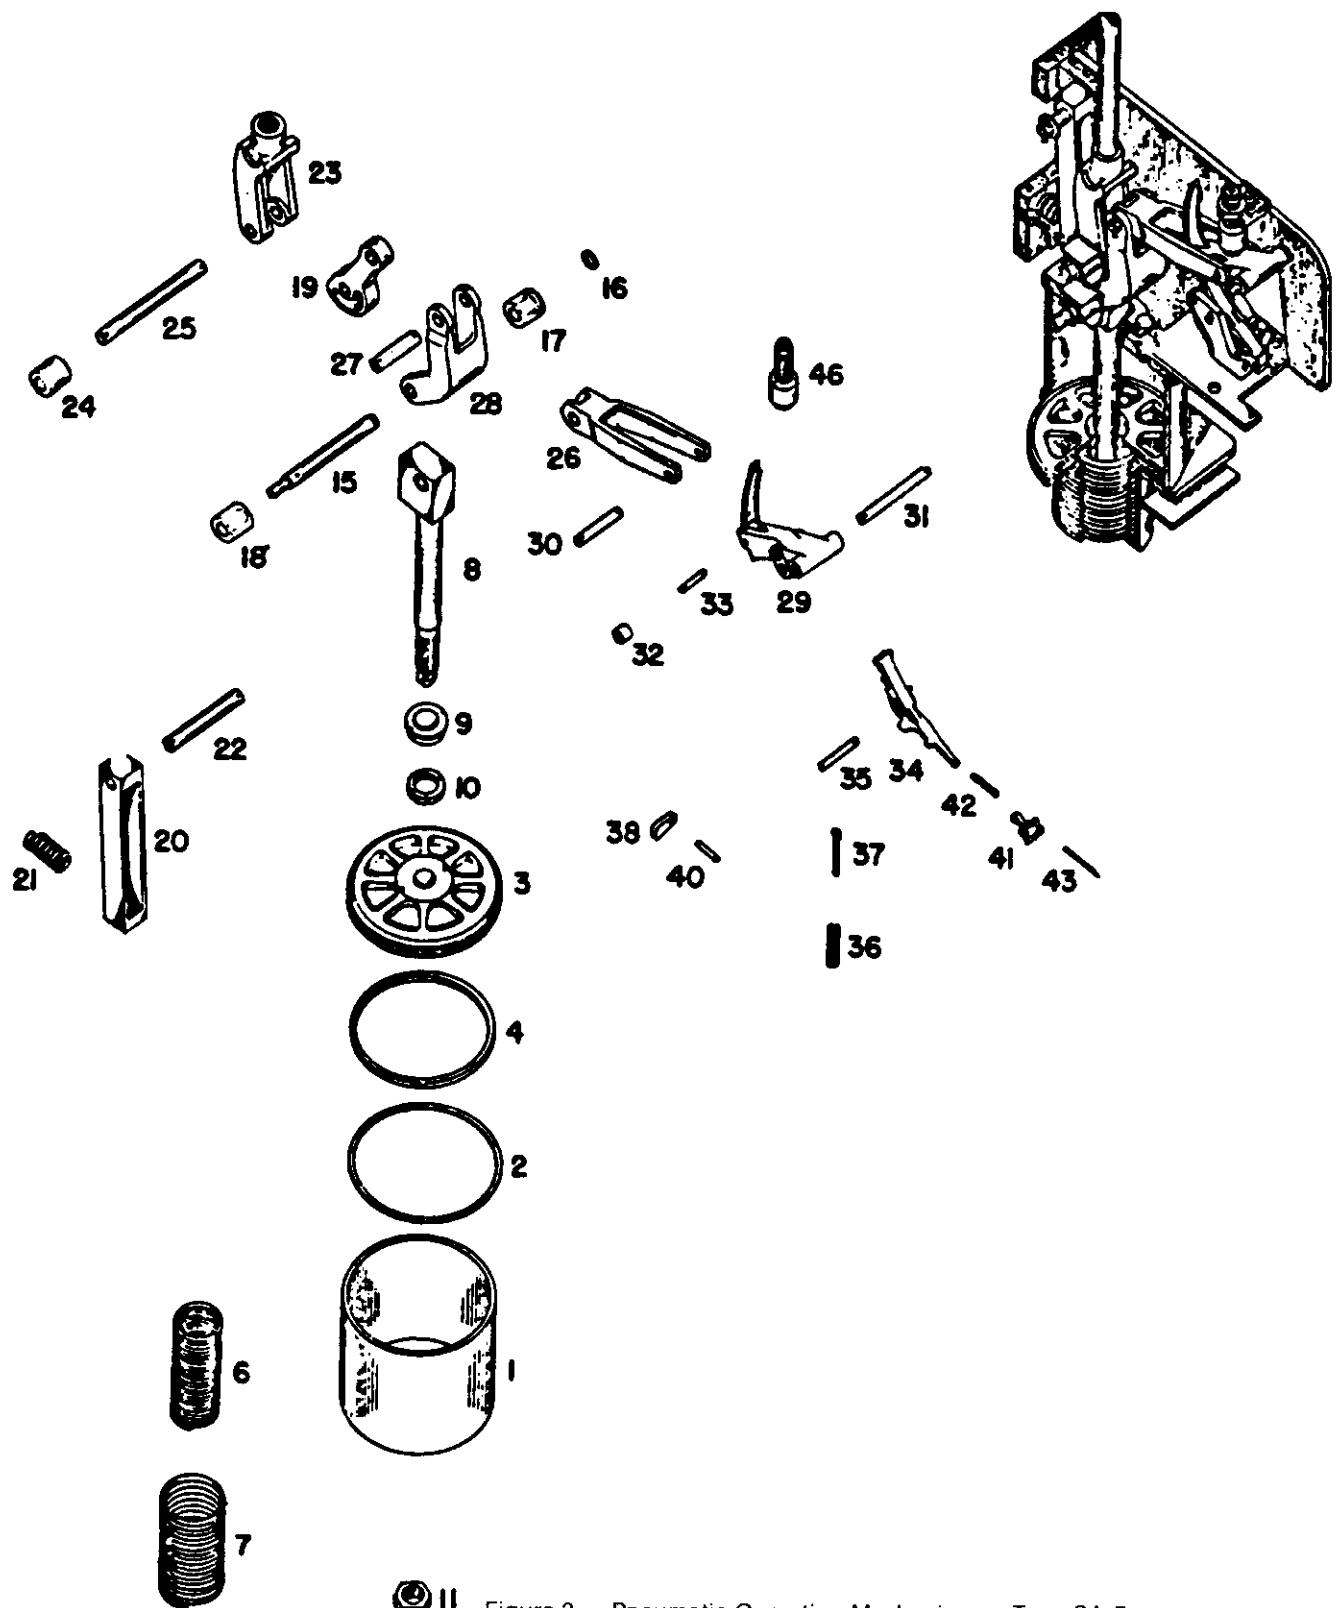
Pneumatic Operating Mechanism — Type SA-7
